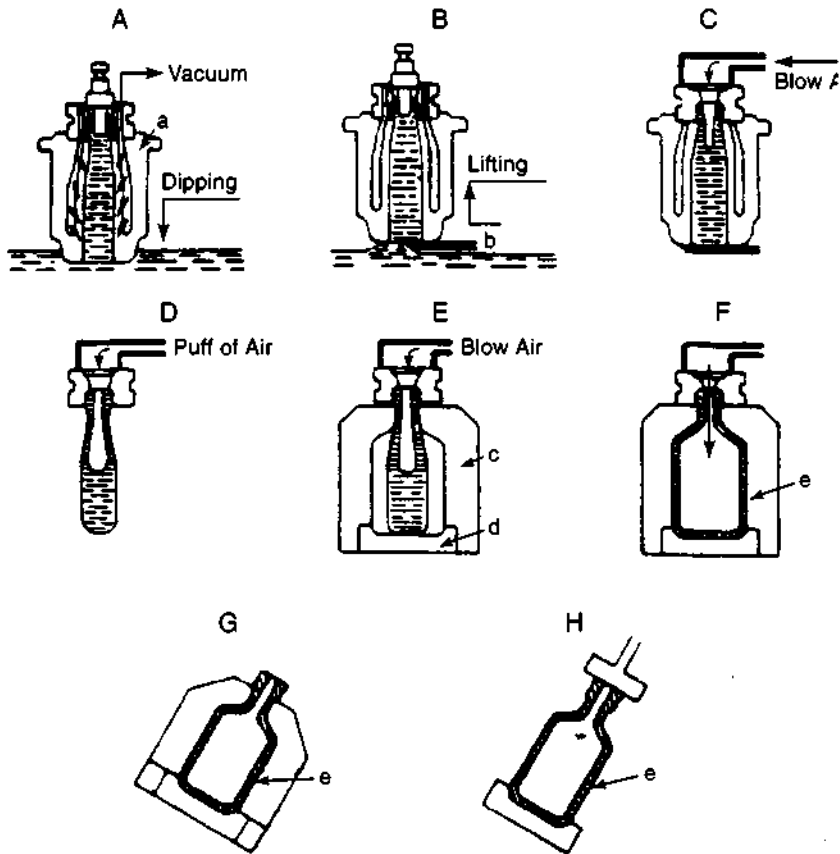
A2b3b The suck-blow molding process for hollowware: A - preform mold being filled by a dipping-sucking process, B - bottom of preform of sucked glass is sheared off and the mold starts its upward movement, C - connection to compressed air supply, D - puff of air partly inflates the preform, E - preform is inserted into the finishing mold, F - the finishing blow, G - removal of the mold and workpiece from the blowing mechanism, H - the finished workpiece. Identified components: a - preform mold, b - shears, c - finishing mold, d - bottom-forming mold section, e - finished glass bottle. (Courtesy Schott Glas.)
